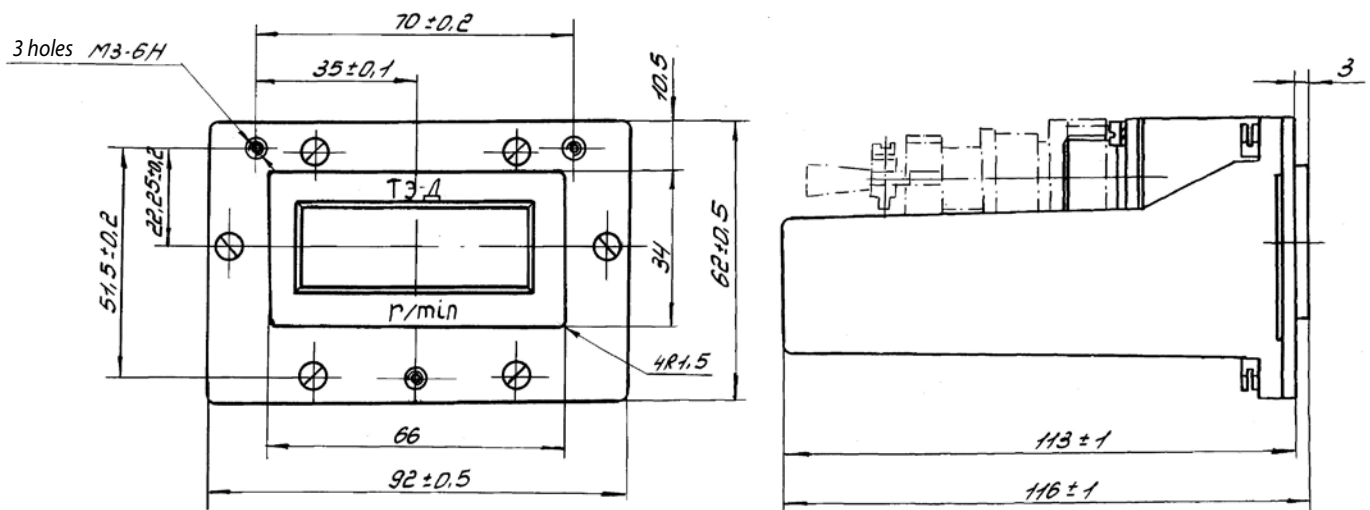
Overall and attachment dimensions of indicating device ТЭ-Д
